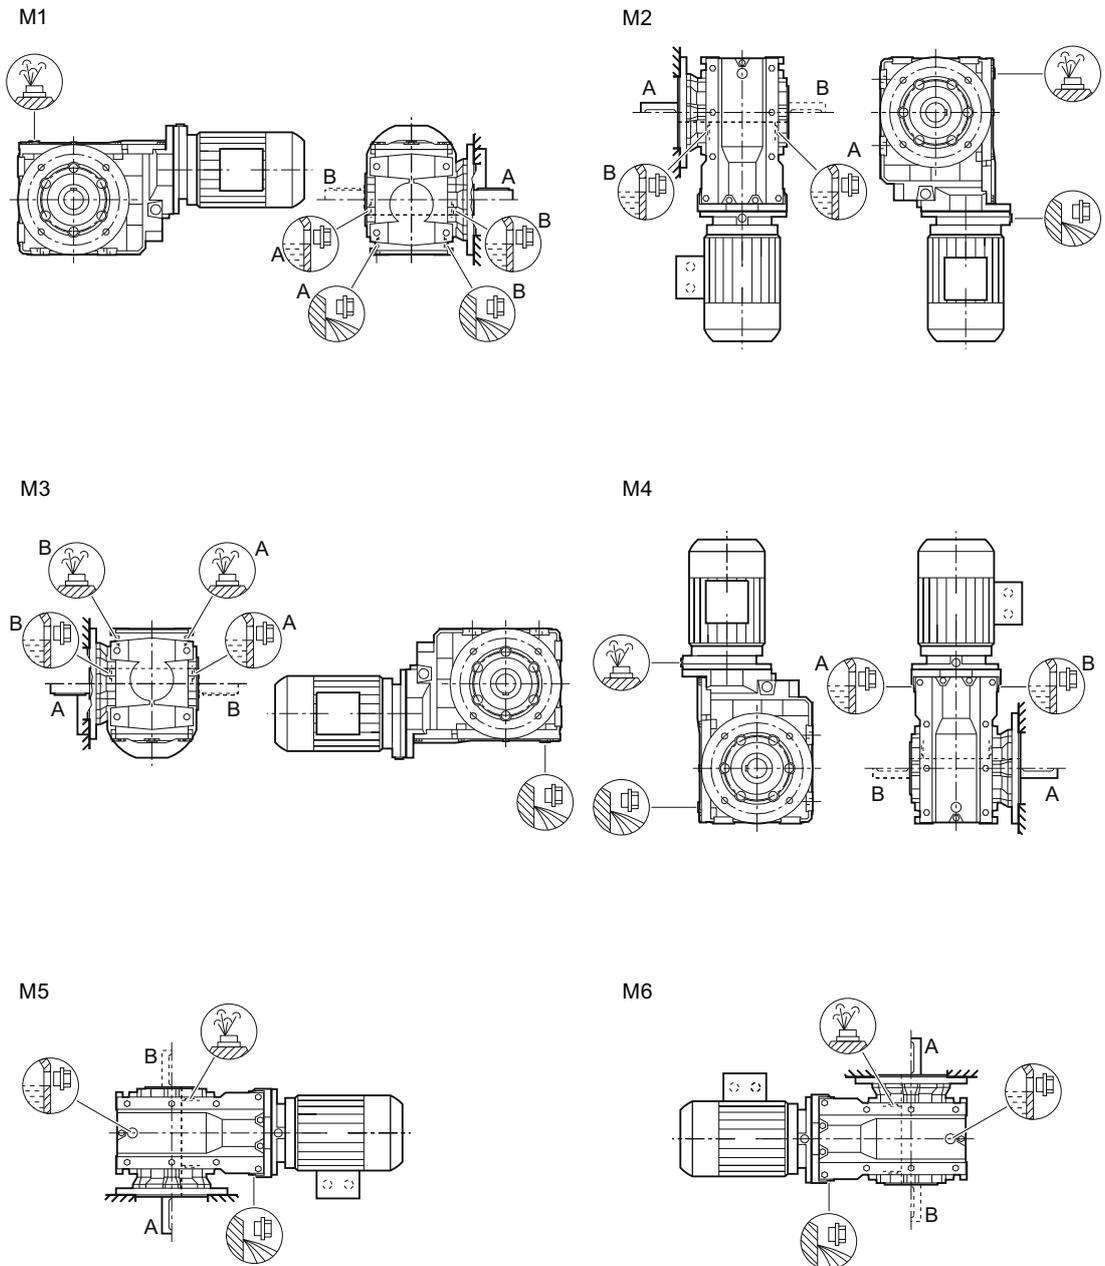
Mounting position for bevel gearbox B.Z housing flange design and B.F flange design, sizes 39 and 49
